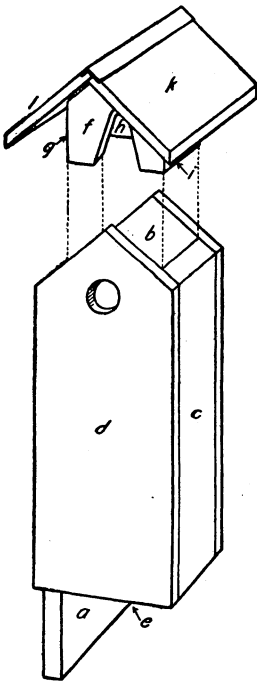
Flicker house to be mounted on post or stub of tree.
